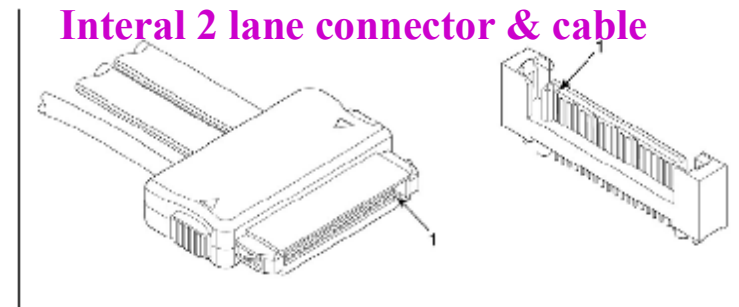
Isometric drawings of the internal 2 lane cable and connector
